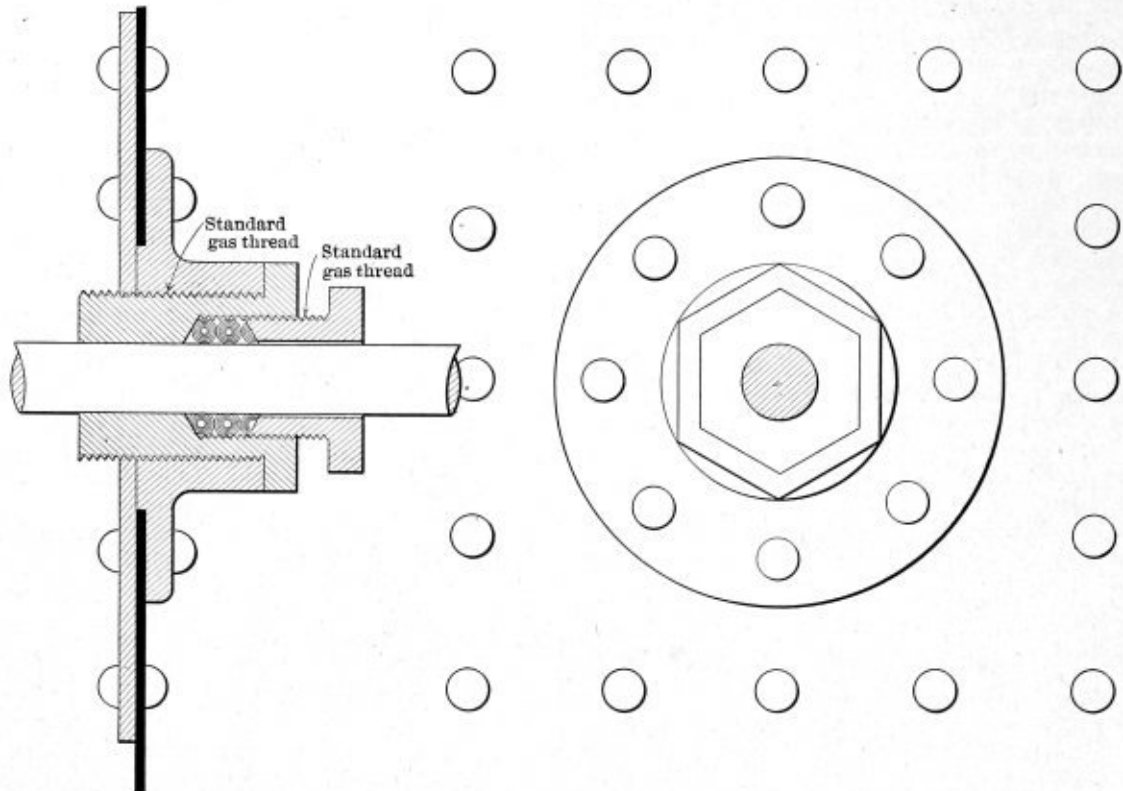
Design Showing Doubling Plate (Omitted in the Case of Heavy Material). Special Cast Iron Bushing to Take Hexagon Gland Bush for Packing Spindle Fluid Tight
